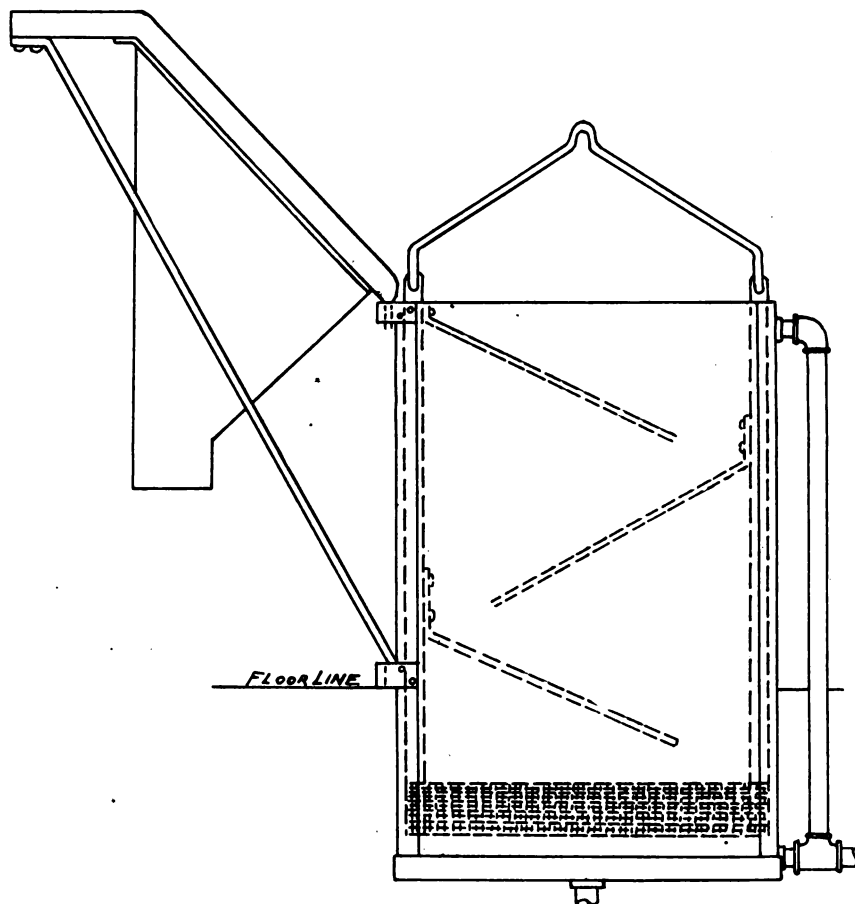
SHOWING SIDE ELEVATION OF THE TANK WITH INNER FRAME LOWERED
